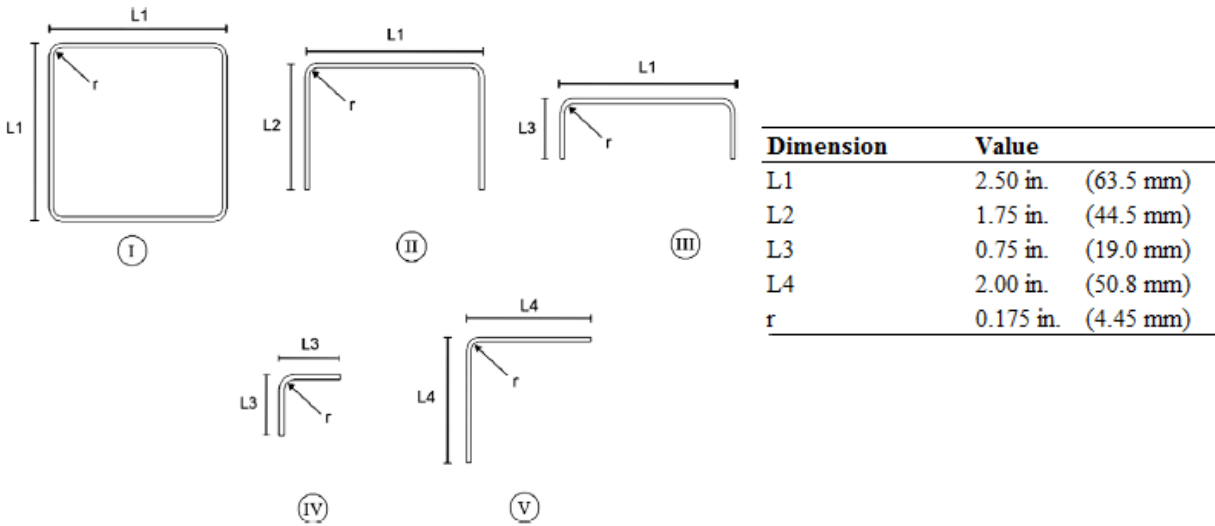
Five channel geometries and dimensions I. Tube, II. Large c-channel, III. Small c-channel, IV. Small corner, and V. Large corner.
